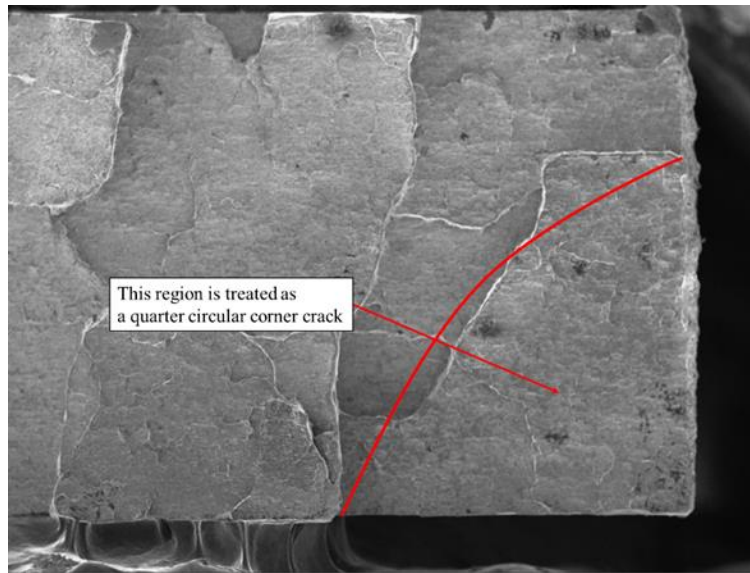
Fracture surface of a specimen that has been analyzed using linear elastic fracture mechanics. Fractography suggests crack initiation in the form of a quarter circular corner crack as shown.
